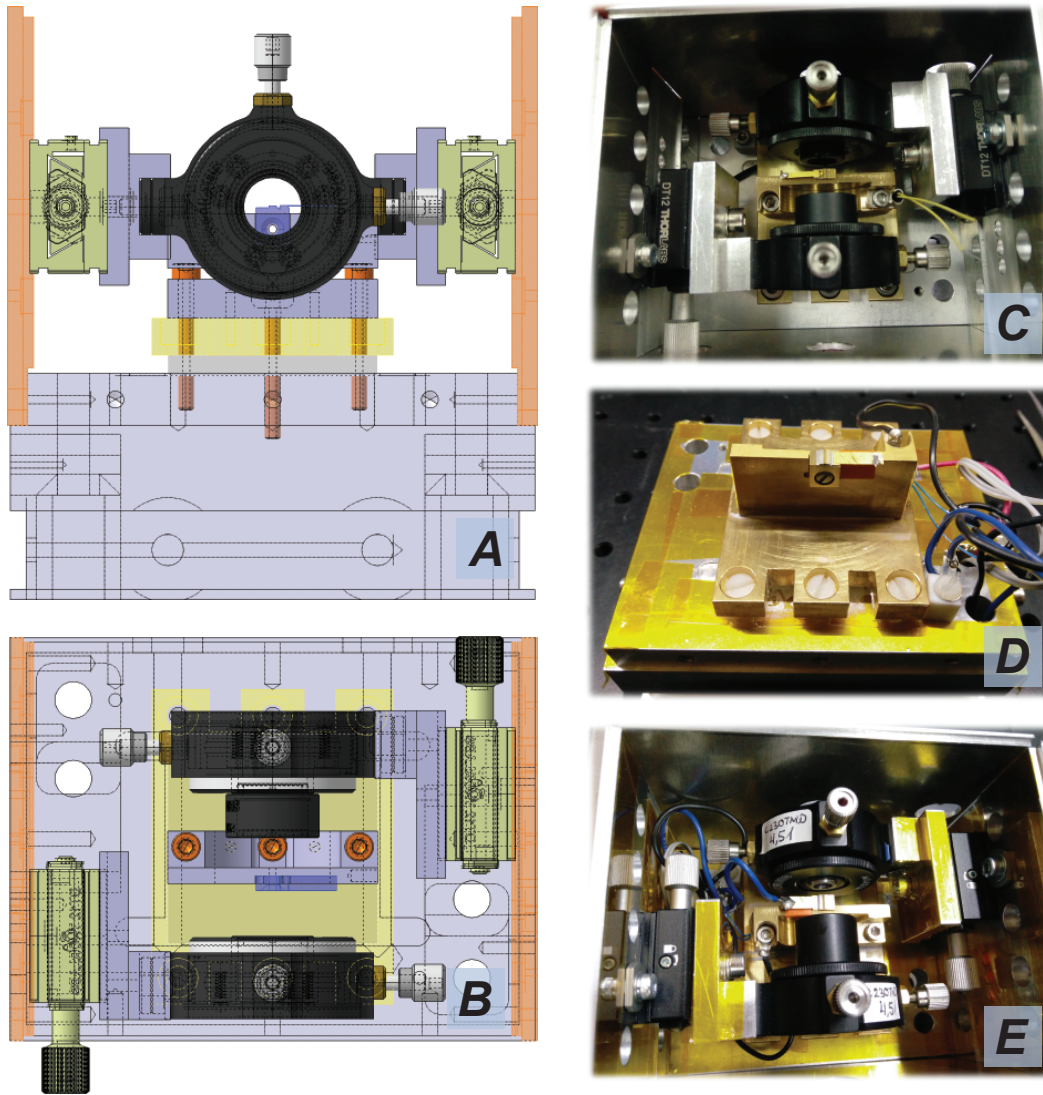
TA support: complete assembly. A and B show CAD assembly design, while C–E depict photos of the TA support at different setup stages.
